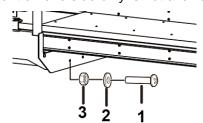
Platform assembly 1.Bolt 2.Washer 3.Nut
